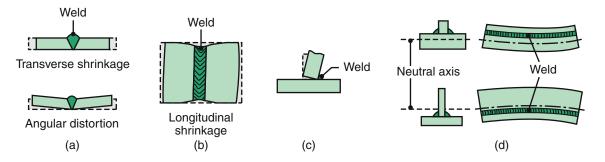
Distortion of parts after welding. Distortion is caused by differential thermal expansion and contraction of different regions of the welded assembly.
